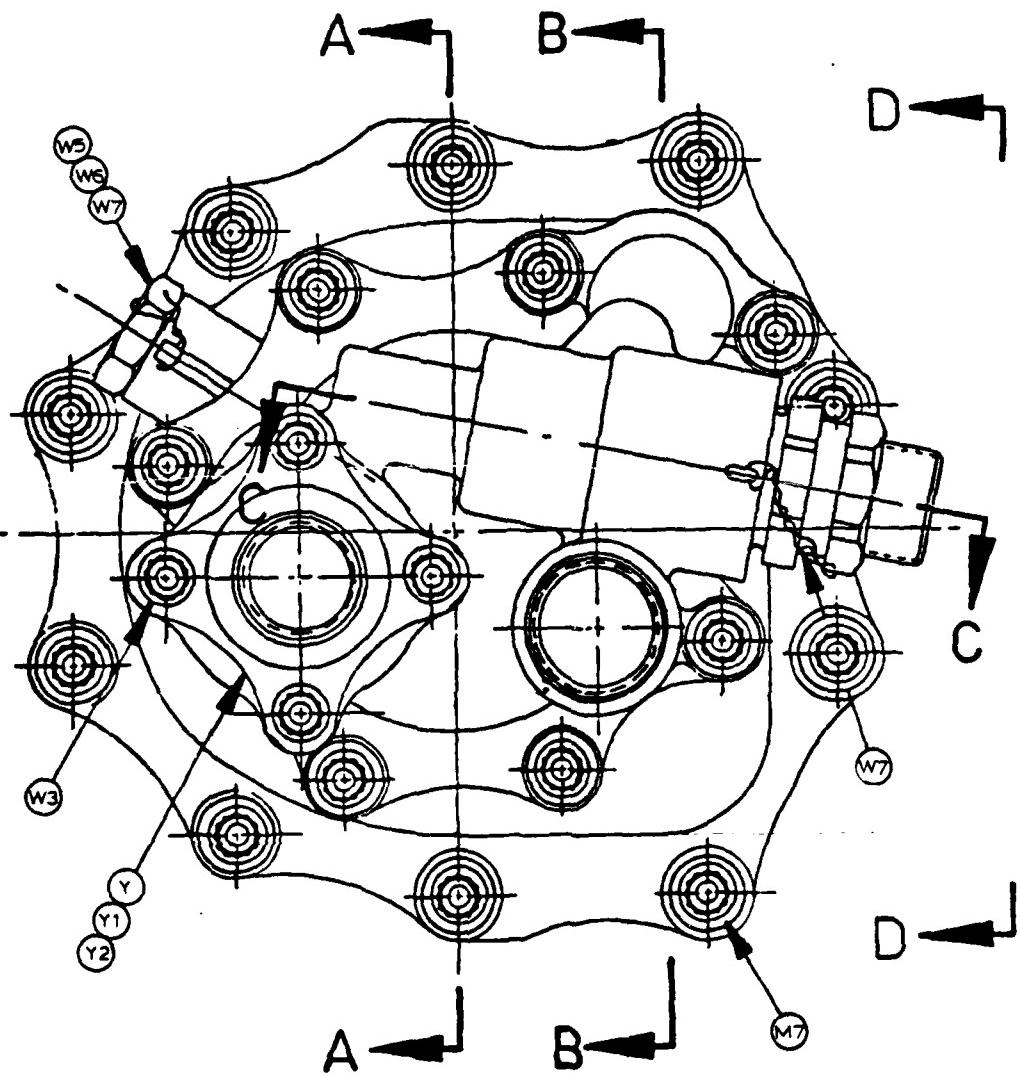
End View of Pump, Showing Valve Block End, Hydraulic Connection Points and Section Views
